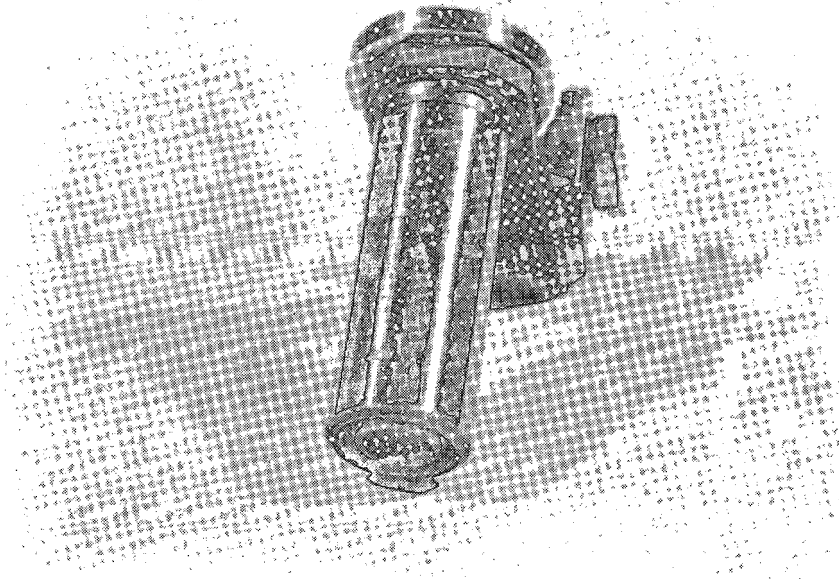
Photo C -Additional pitted area on link pin. The pin had to be forcibly removed from the actuator link spherical bearing after completion of the test.
